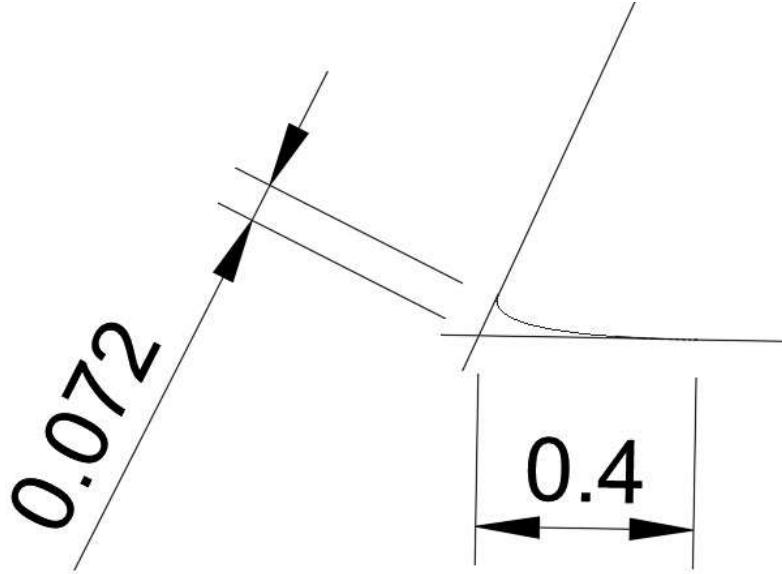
Sketch of cutting edge in Autodesk Fusion. The dimensions in the drawing are S_α and S_γ
